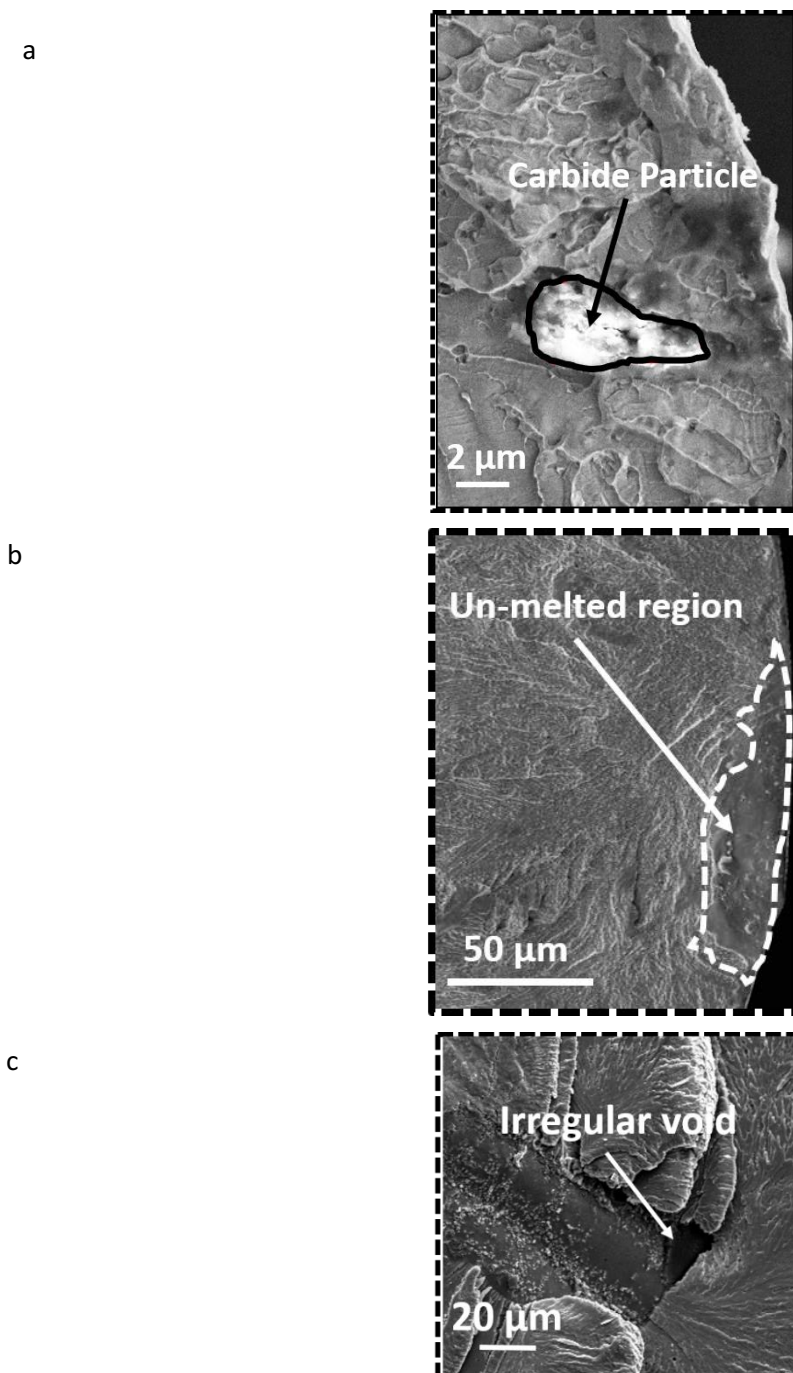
Magnified fracture surfaces of wrought (a), and two AM fatigue specimens (b and c) showing the presence of different types of defects at crack initiation sites.
